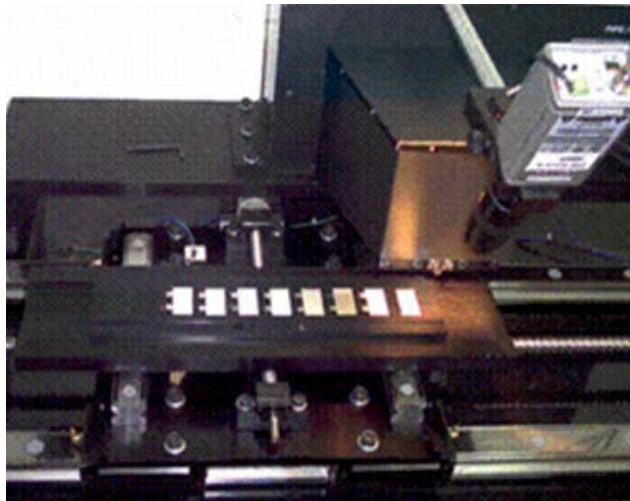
Welding Head picture showing the X-Y table and the electrodes head.
